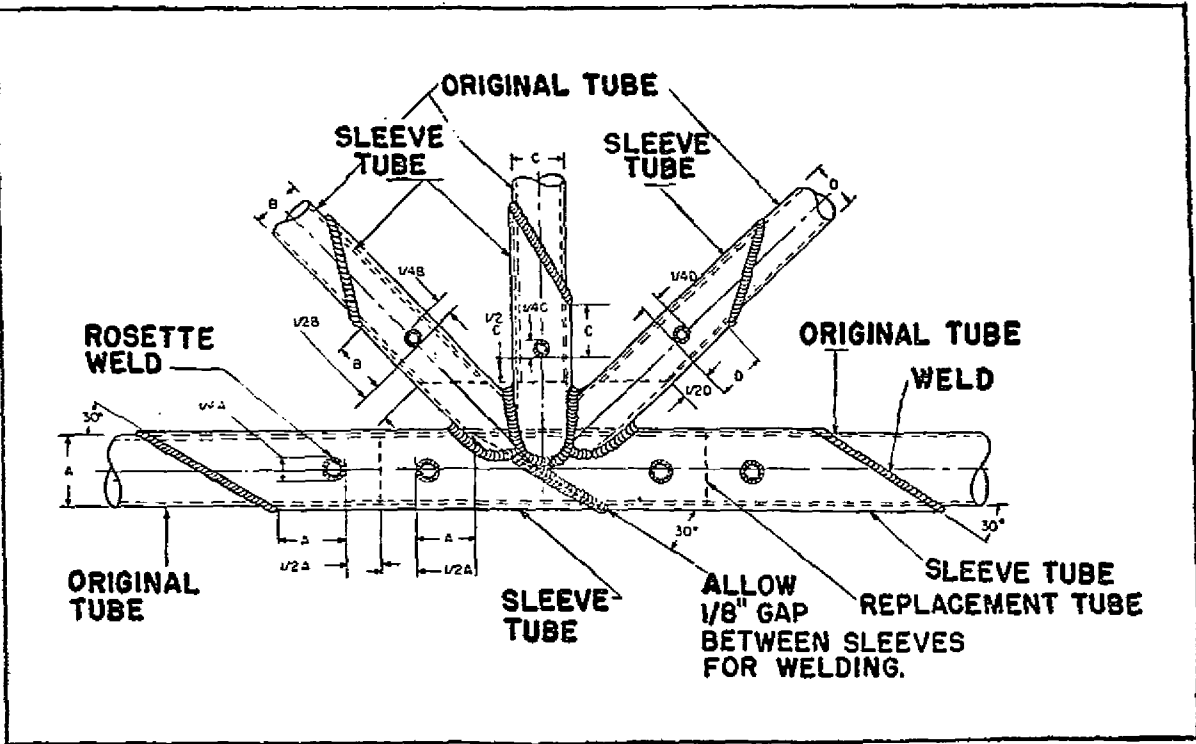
Tube Replacement at a Station by Welded Outer Sleeves. Ref. CAM 18.20-3(b) (2) (vi), 18.20-3(b) (5) (iv)
